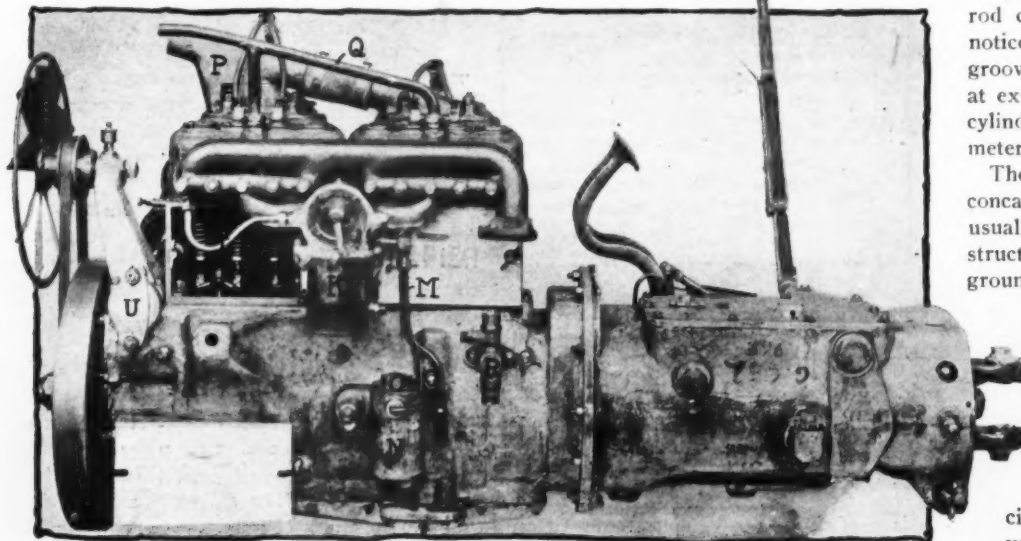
Napier motor. U, cover plate; K, carburetor; N, O, oil pump; M, oil by-pass; P, Q, water outlets
